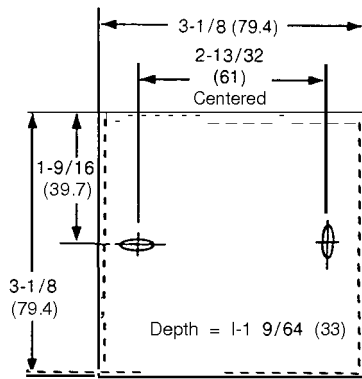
TS-81011 Series Mounting Dimensions European 1/4 DIN Standard Mounting.
